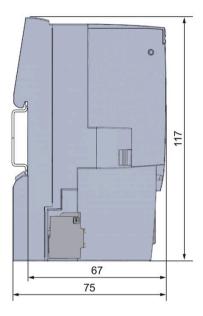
Dimensional drawing CPU 1510SP-1 PN
